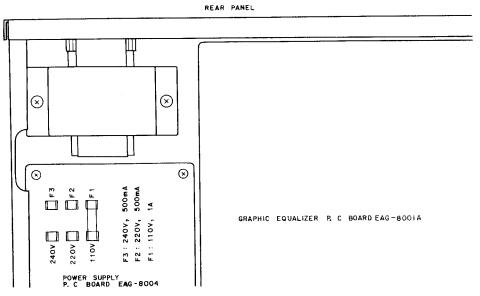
Power Supply P.C. Board (EAG-8001A)
